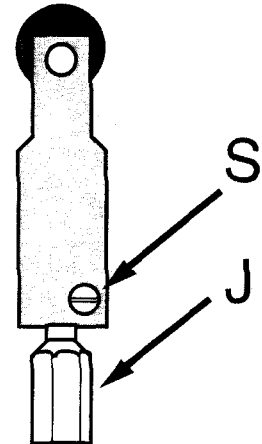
Reverse or Direct Acting setting and Throttling Range Adjustment
